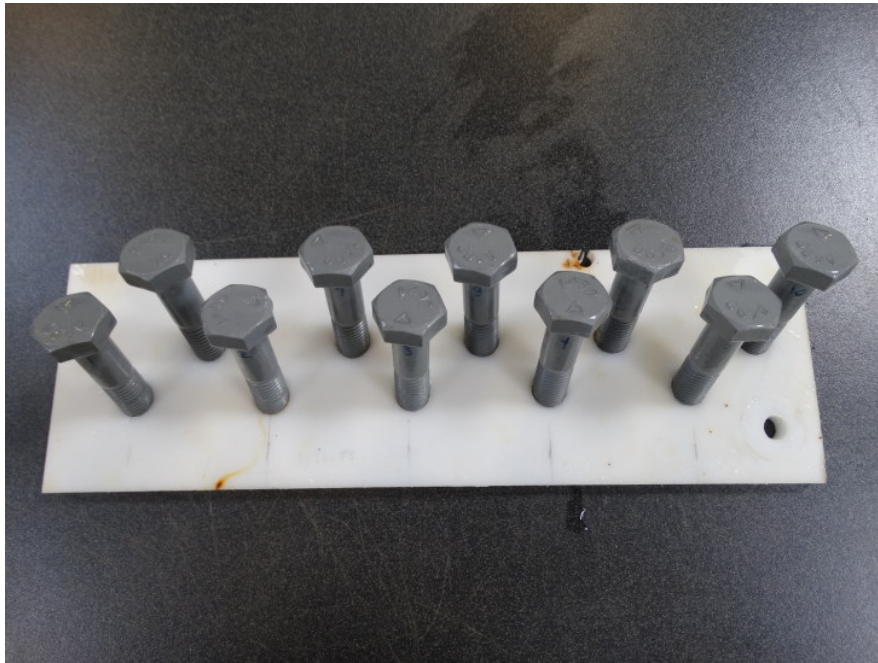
3/4 inch specimen bolts after 5000 h of salt spray exposure
